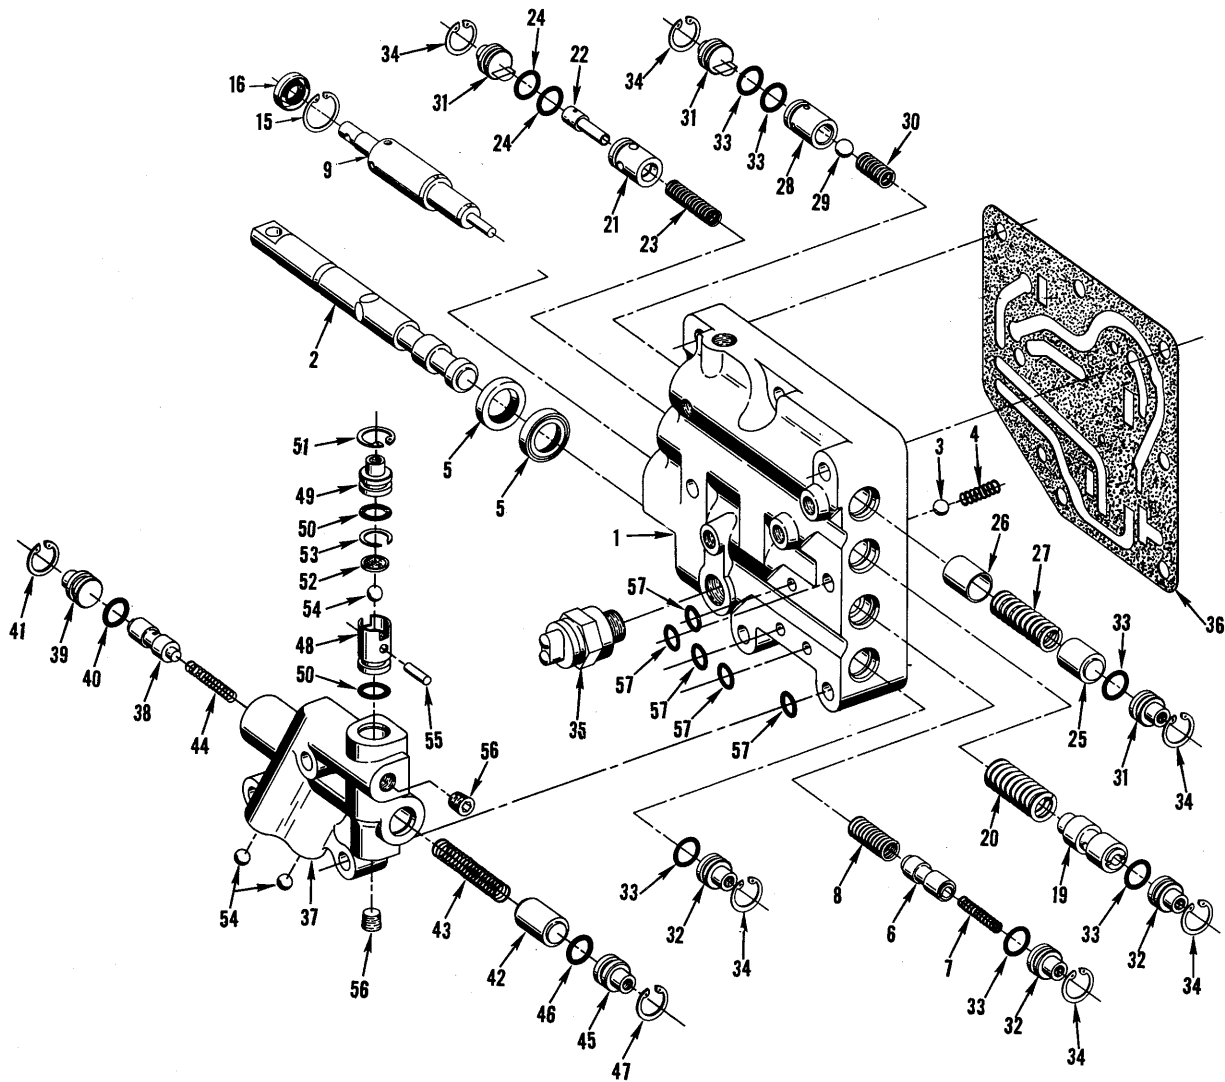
B - TRANSMISSION CONTROL VALVE AND REGULATOR
